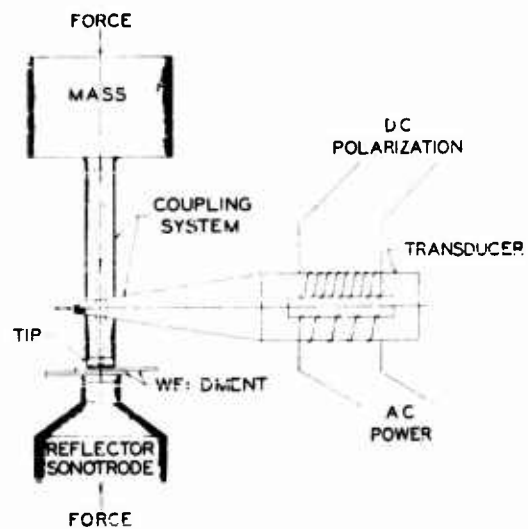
SCHEMATIC OF REED-WEDGE WELDING SYSTEM
